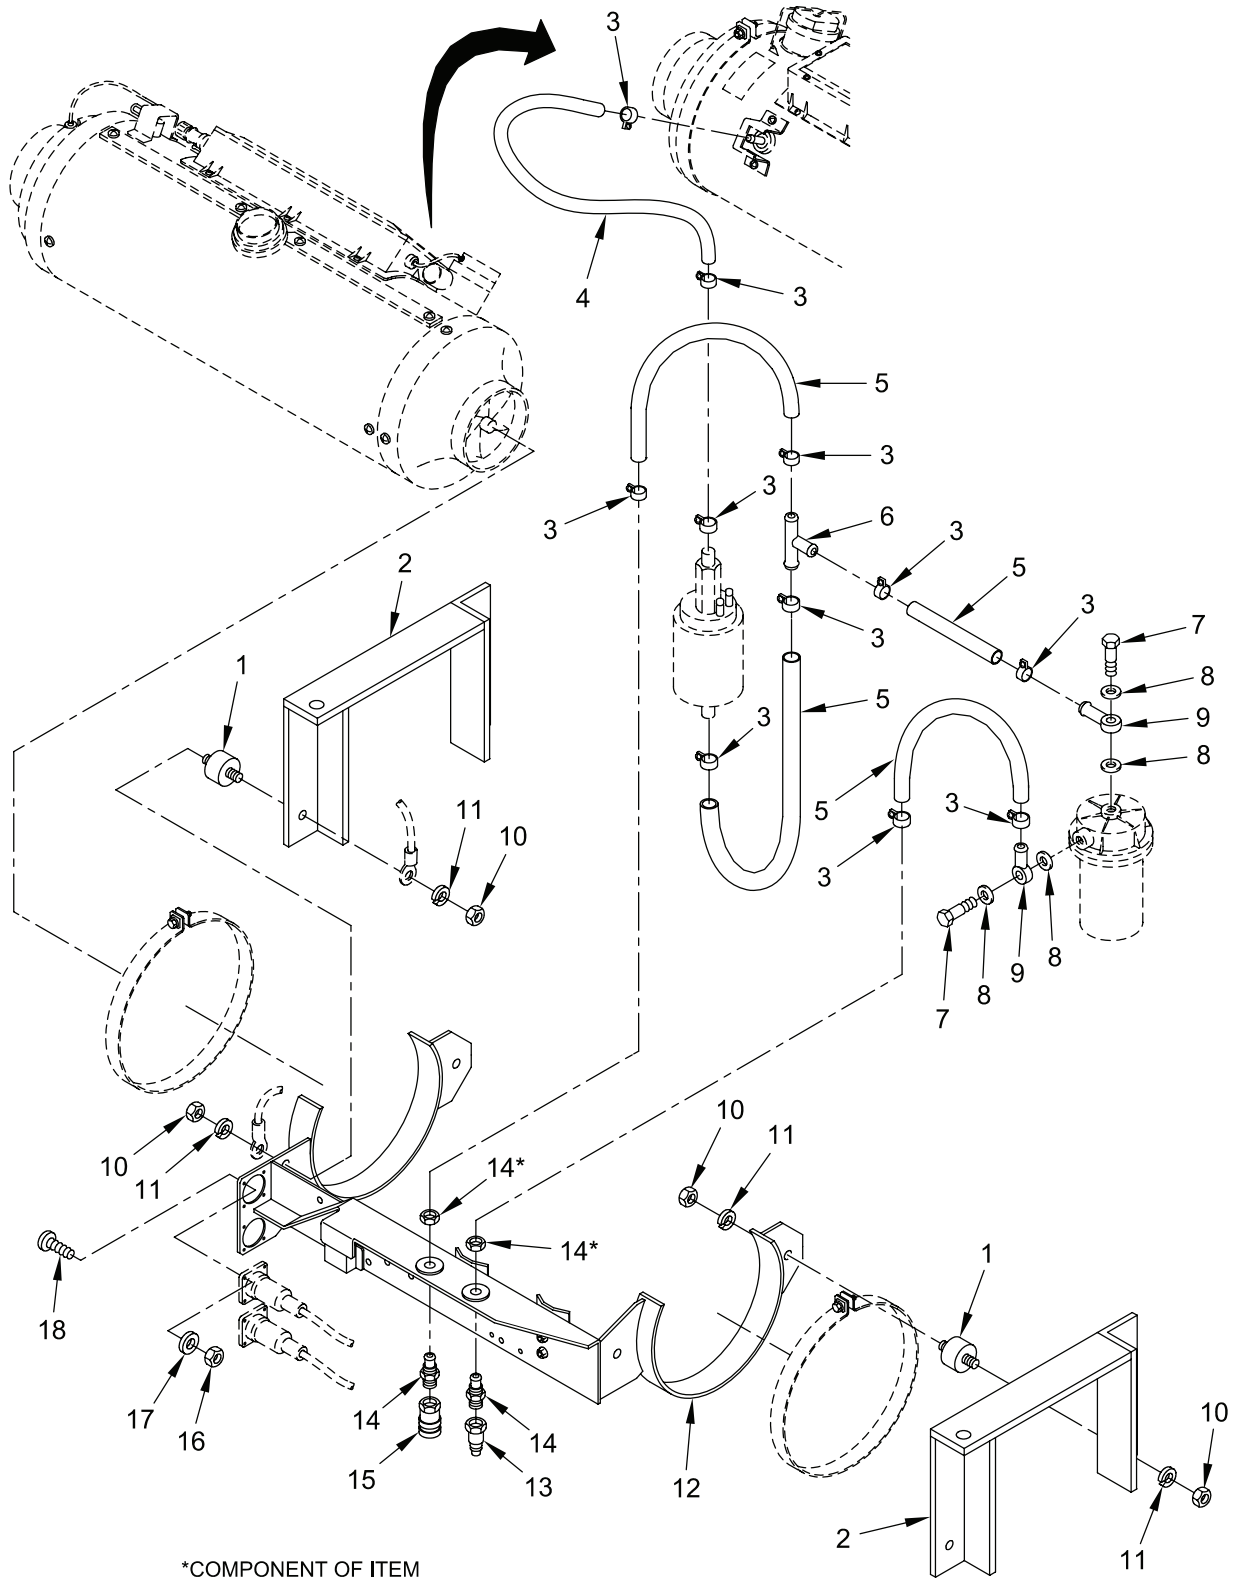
ESPAR V7S Vehicular Compartment Heater Mounting Assembly
